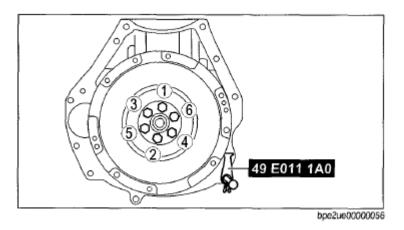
Identifying Crankshaft Mounting Bolt Tightening Sequence
